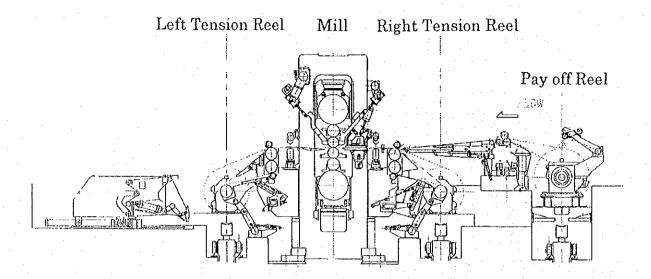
Schematic Drawing of Reversing Cold Rolling Mill
